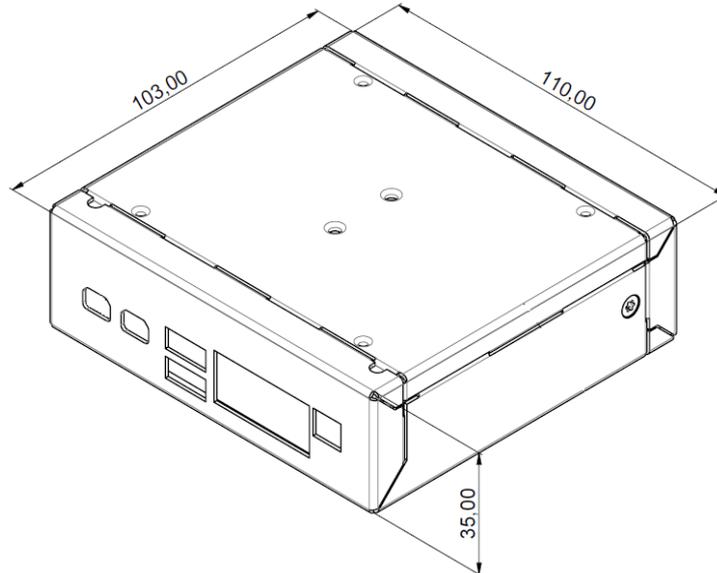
ABox-93xxLA (without connectors), Dimensions (mm), Bottom View
